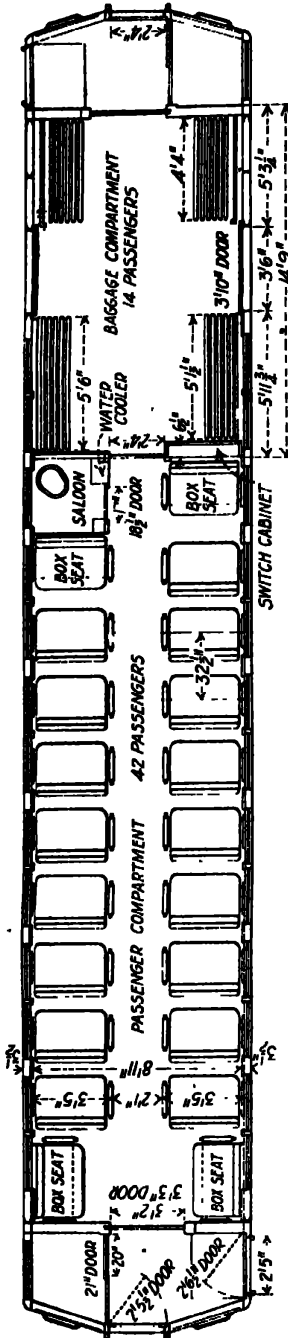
Seating Plan of Typical High-Speed Interurban Car
